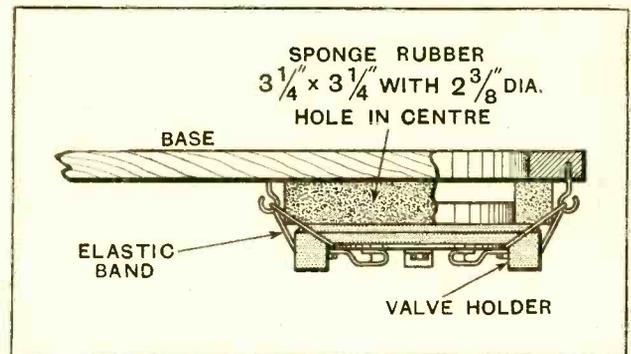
Sectional sketch showing shock-absorbing mounting for multiple valve holder.
